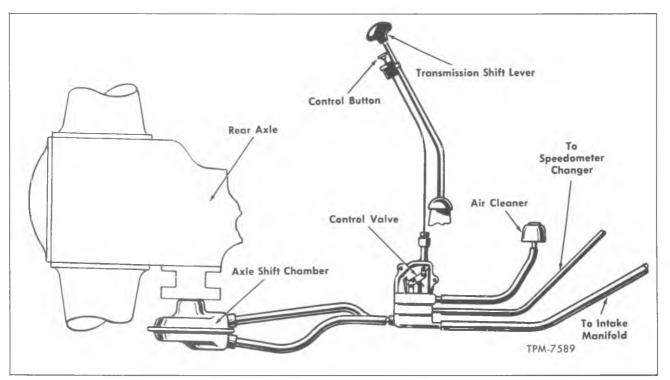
Arrangement of Two-Speed Axle Vacuum Control Units (Typical)
